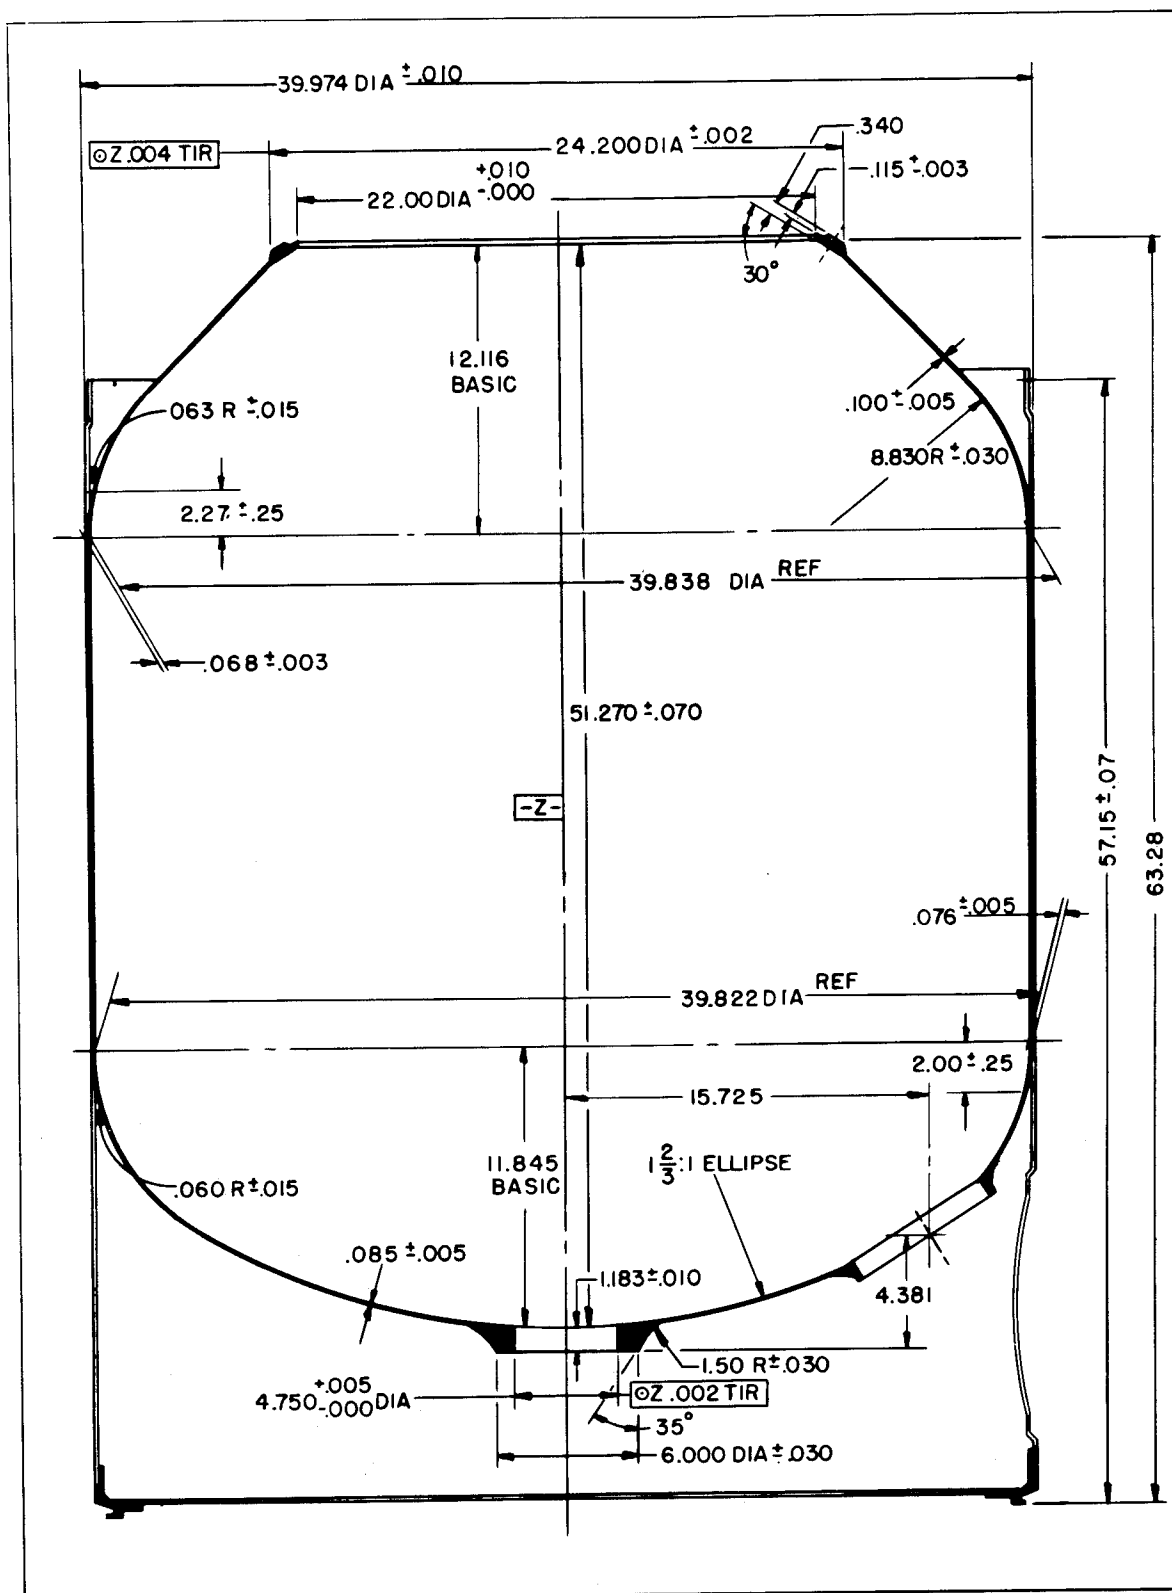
Drawing of Full Scale 40 Inch Diameter Rocket Motor Case.
